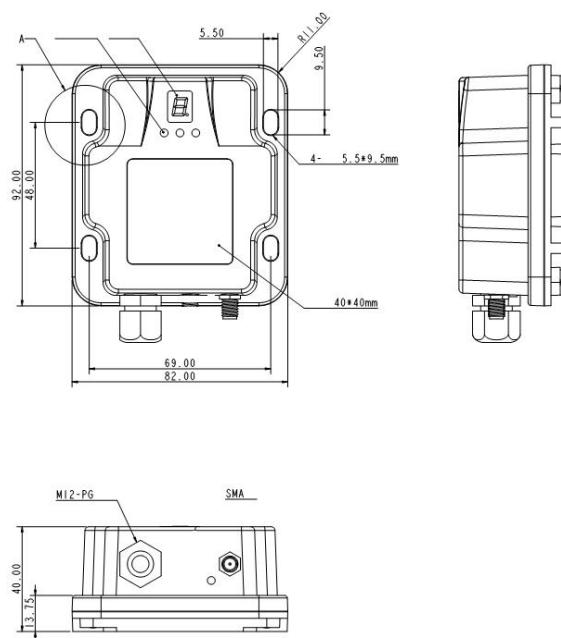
Dimensional drawing of RMINI-M1 series receiver
